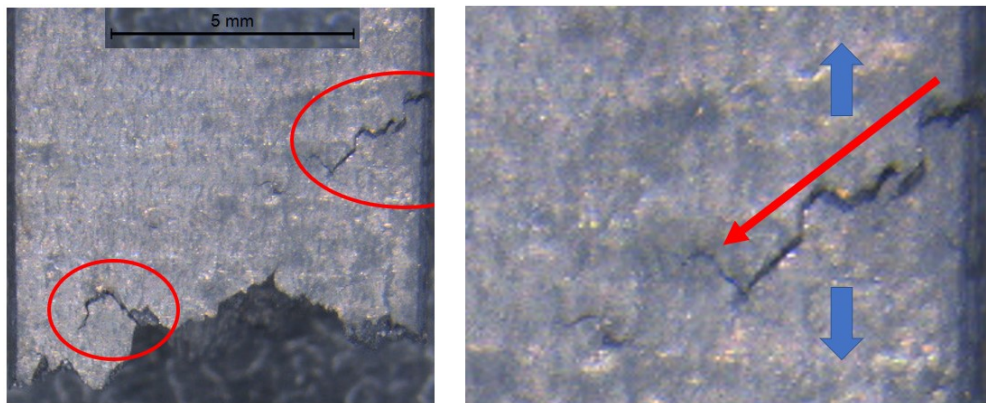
Optic images of the tensile traction fracture surfaces - Top side of the 550°C traction specimen
